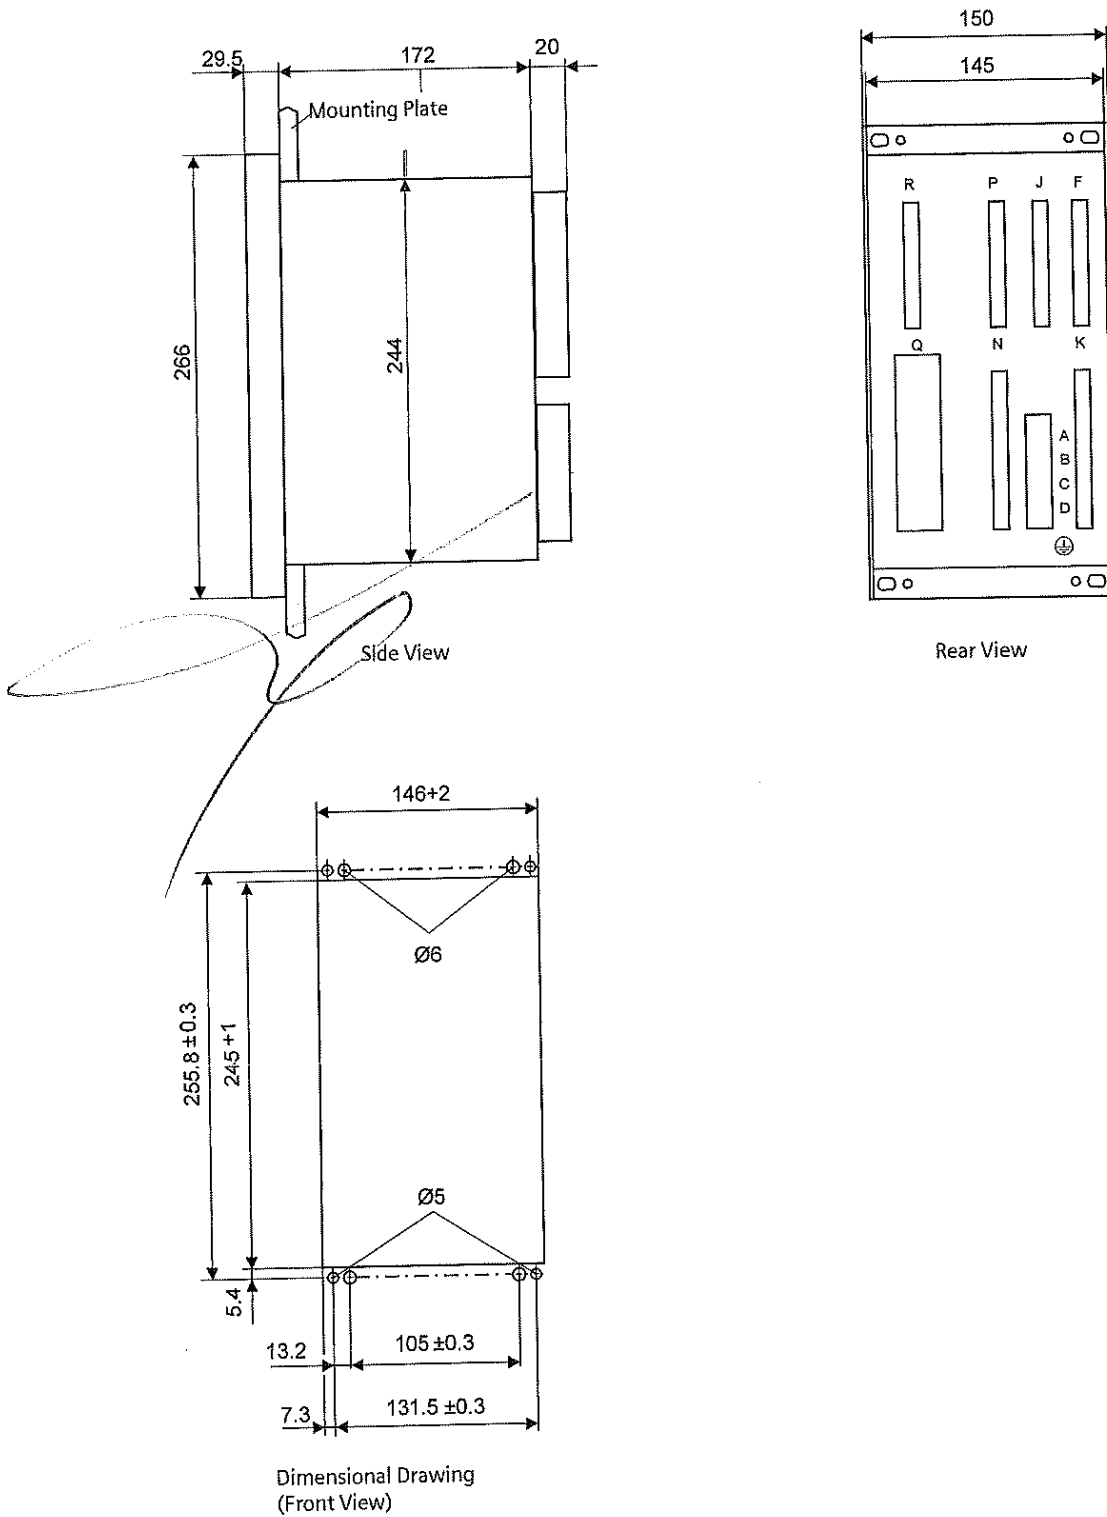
Dimensional drawing for SIPROTEC 7SJ66 (housing size 1/3)
